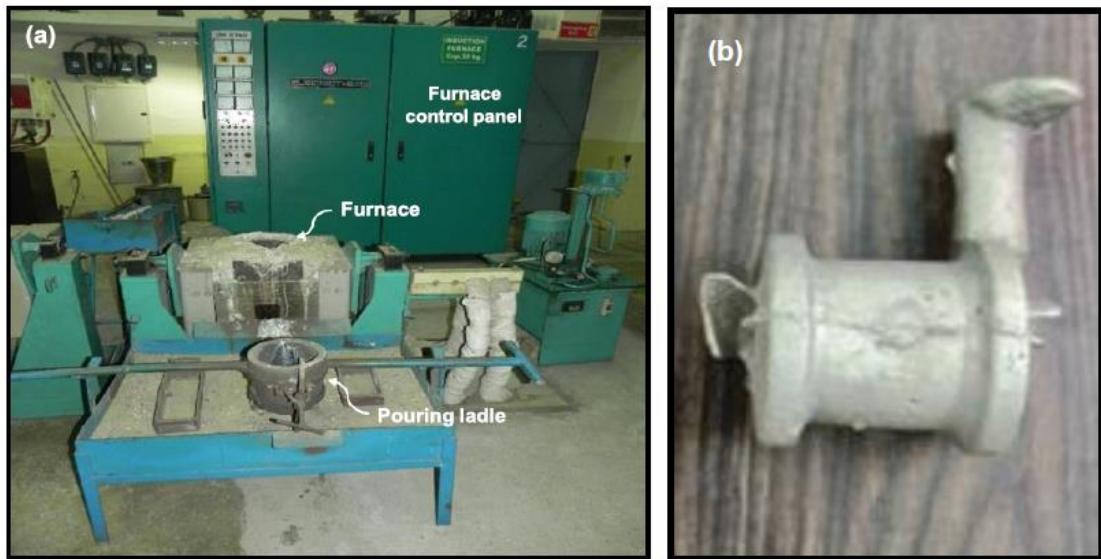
(a) Furnace to melt metal and pouring ladle and (b) cast.
